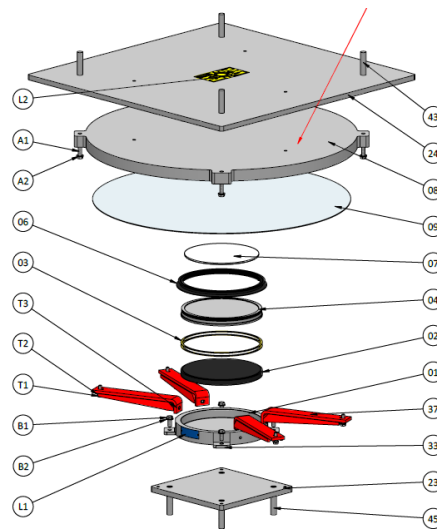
3D exploded view of TETRON[®] CD GL 3000.600.600.
